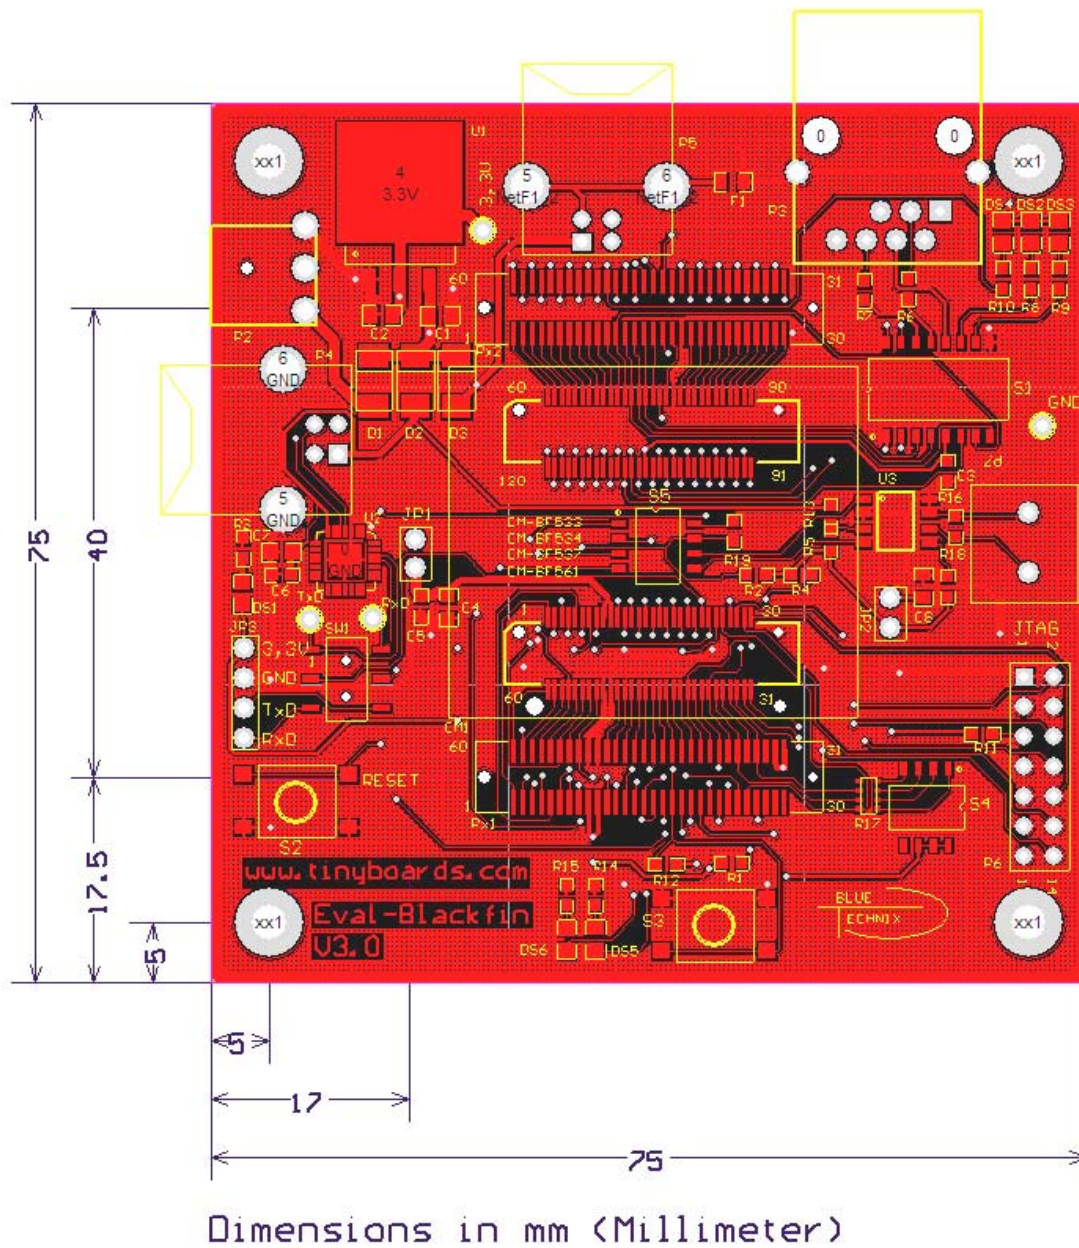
Mechanical Outline – Expansion Connector Placement
